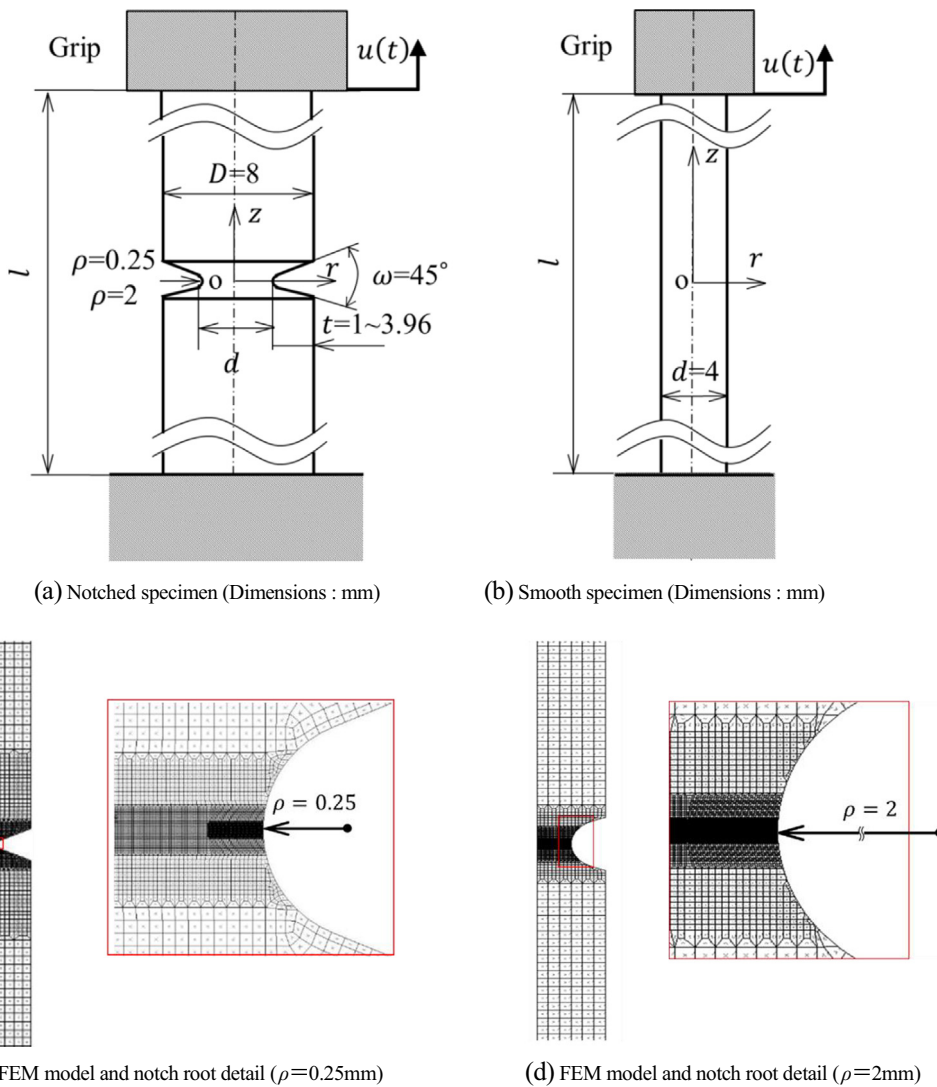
Geometry of specimens and FEM models (Dimensions: mm).
